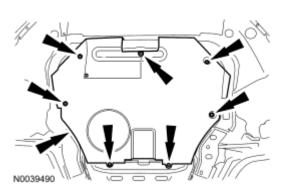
Locating Splash Shield Bolts Courtesy of FORD MOTOR CO.
